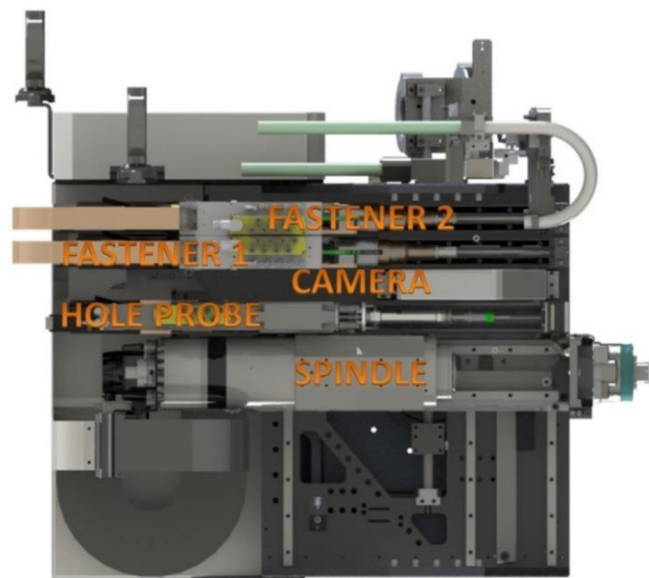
Bottom view of end effector with chassis hidden to show layout of process tools
